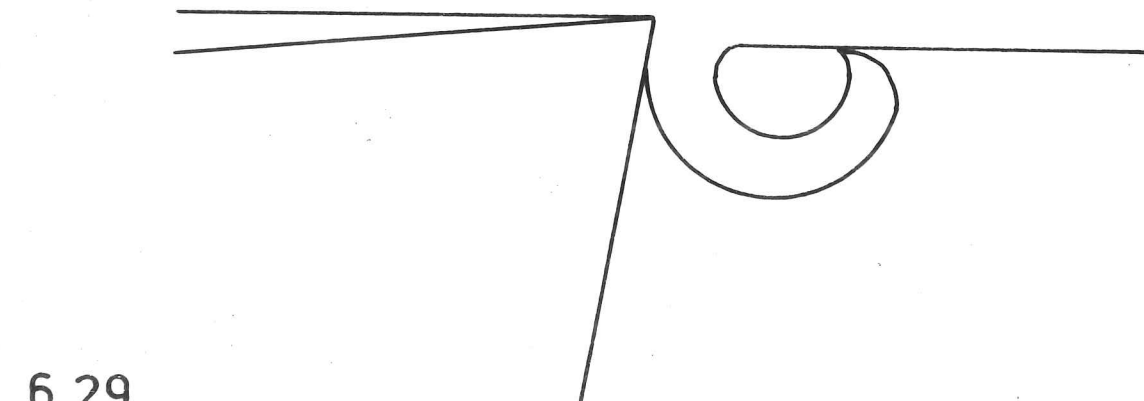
Chip curls over and touches the workpiece during the initial stage of cutting.
